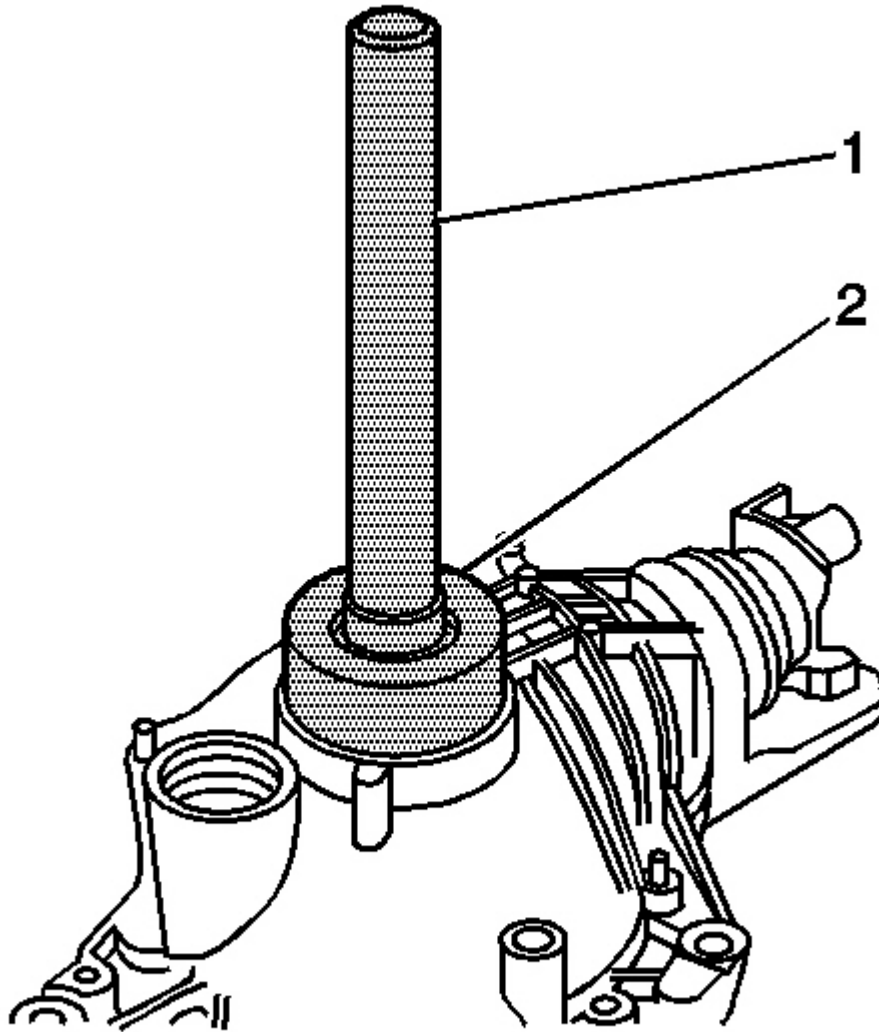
Axle Seal Installer And Universal Driver Handle (Left)
